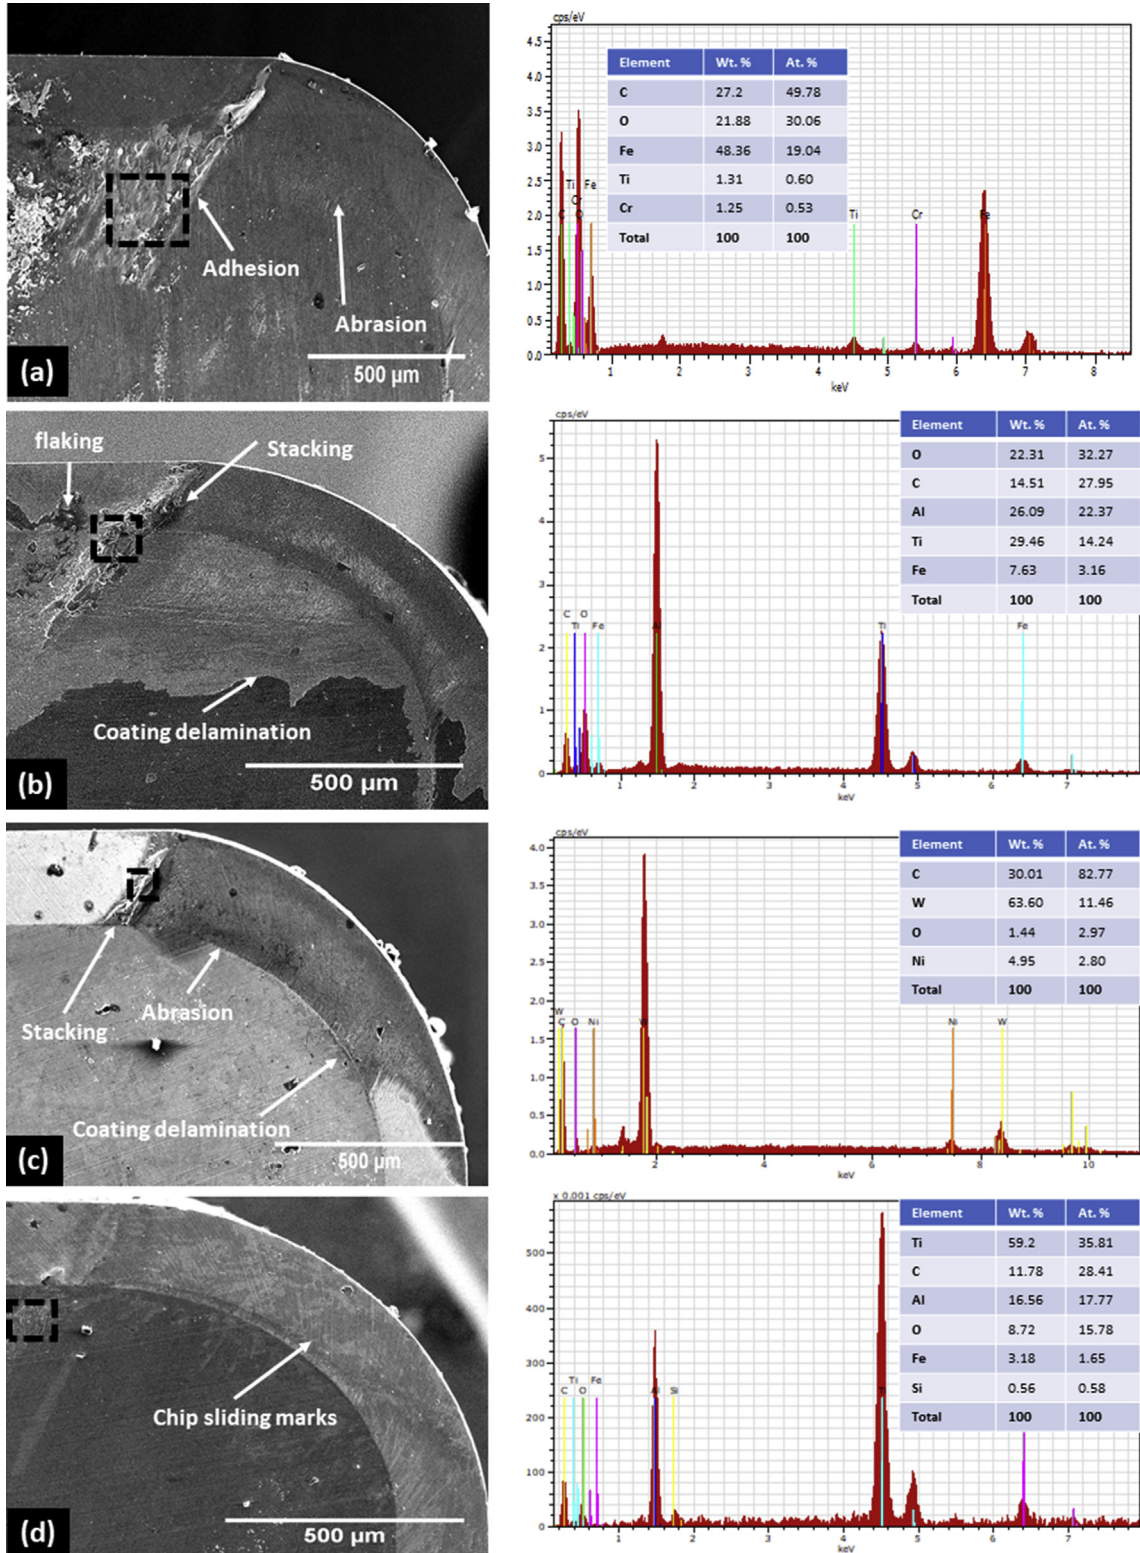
SEM micrographic images of the rake surface while machining at 250 m/min cutting speed with (a) uncoated, (b) DLC coated, (c) WC/C coated and (d) TiAlSiN coated Al₂O₃/TiC cutting tools.
